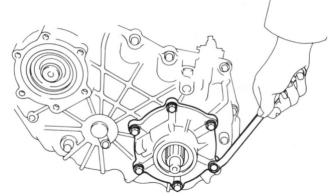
Rear Output Shaft Rear Bearing Retainer
